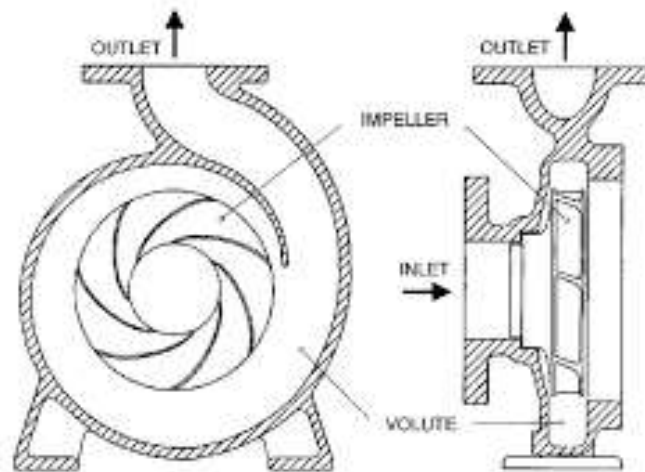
INTERNAL PARTS OF A TYPICAL CENTRIFUGAL PUMP.
